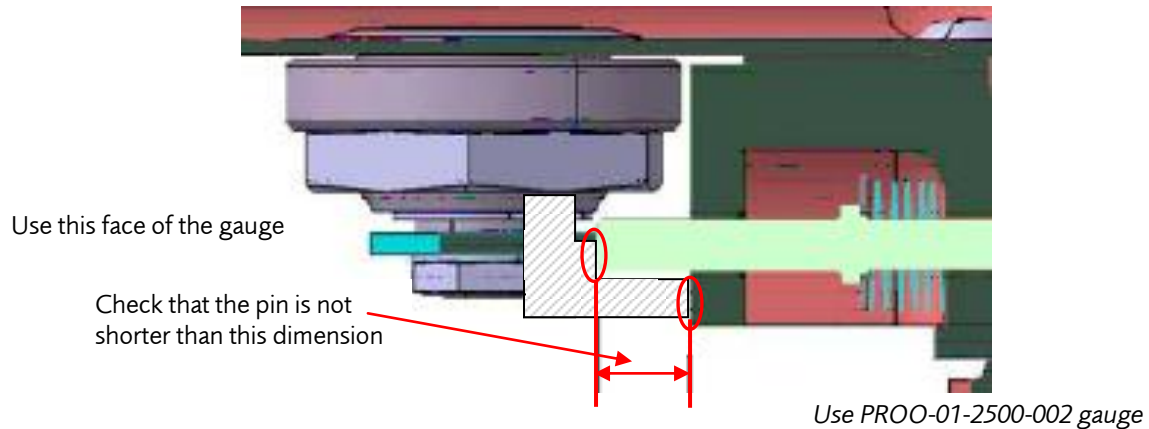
Minimum dimension for Retracted locking Pin Gauge.
